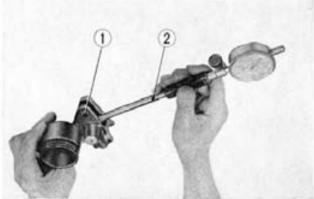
(i) Master cylinder dody (ii) Inside dial gauge
